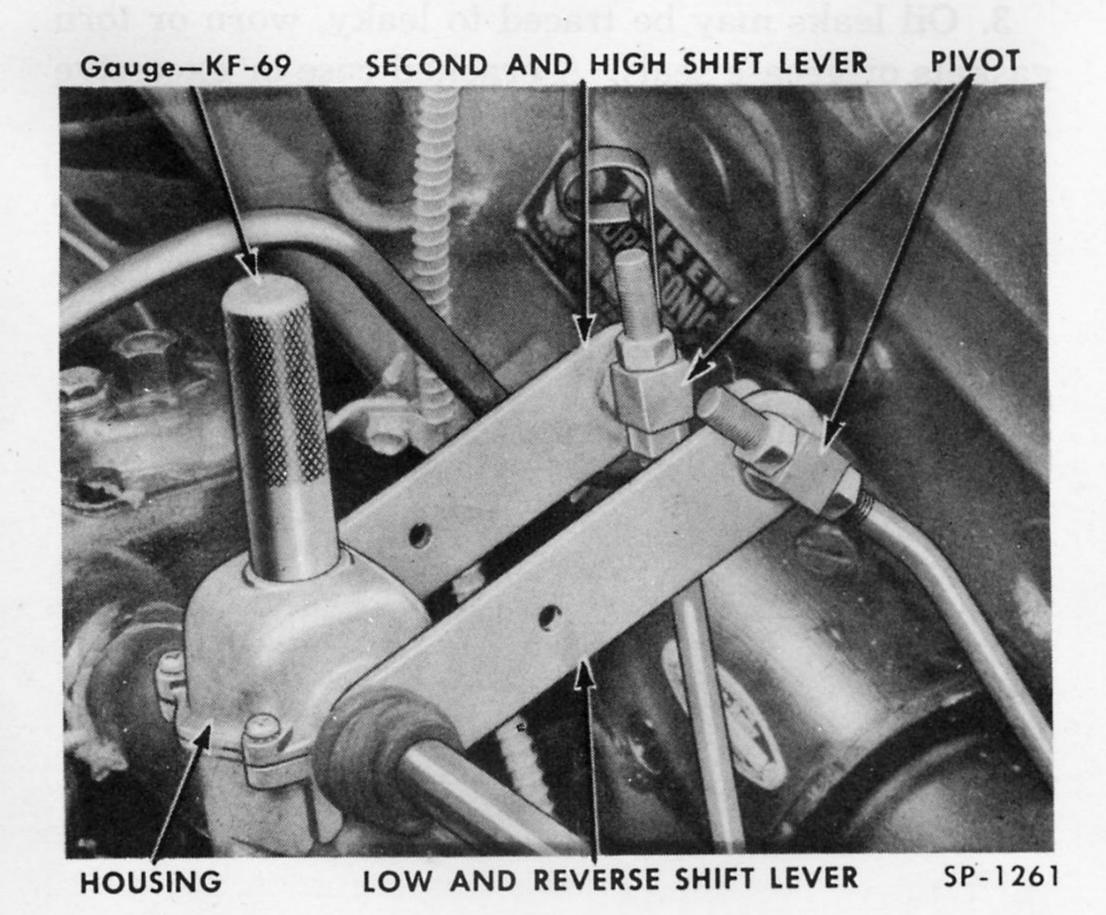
Gearshift Linkage Adjustment—Kaiser
